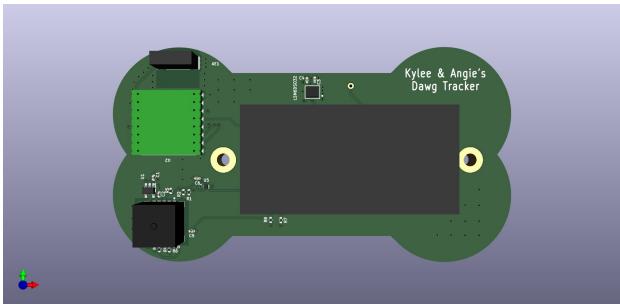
PCB Design of the Dawg Tracker. The largest component of the PCB is the M4 feather. The drilled holes on each side of the M4 feather will be used to mount the piezo speaker (not shown) on the back of the PCB. The 3D model also shows ground clearances surrounding the antenna (top left) and GPS module (bottom left).
